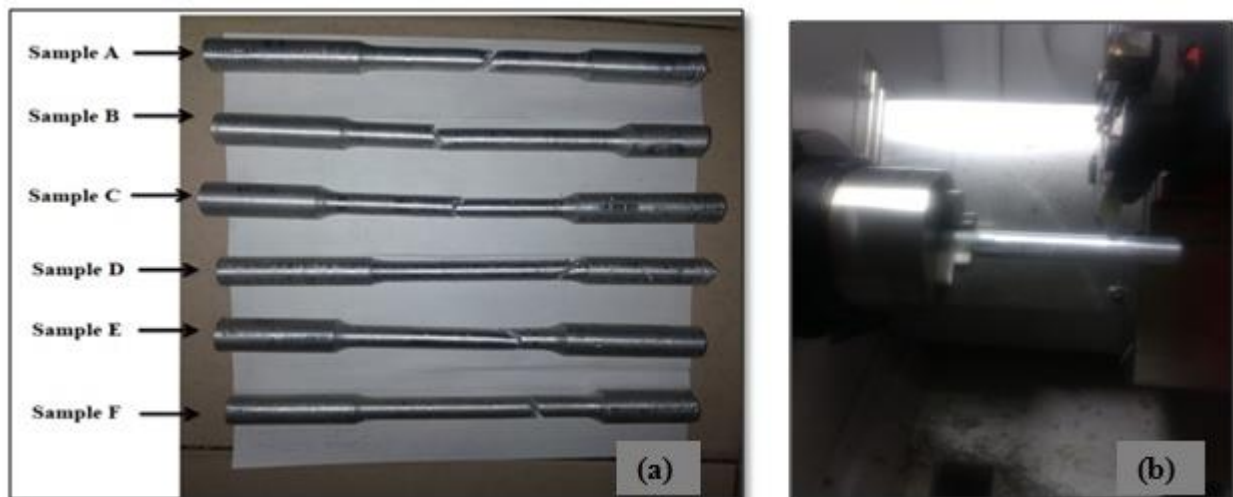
Details of Tensile Test (a) Samples after Tensile Testing (b) Tensile Testing on UTM Machine
